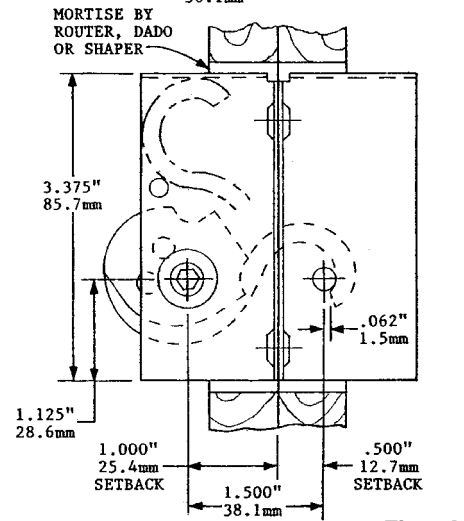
A & 2B: The Type 3 Latch S1500-3-1.000 & Type 3 Receiver shown in these cutaway views of a flange-to-flange mounting in 3/4"/19mm thick framing places the access hole behind the frame.
